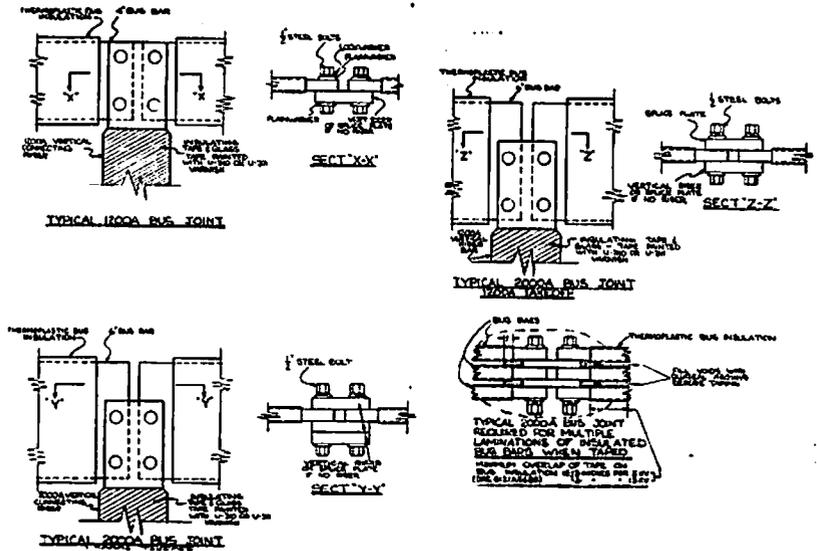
(132C7770) Method of Making Bus Bar Connections
